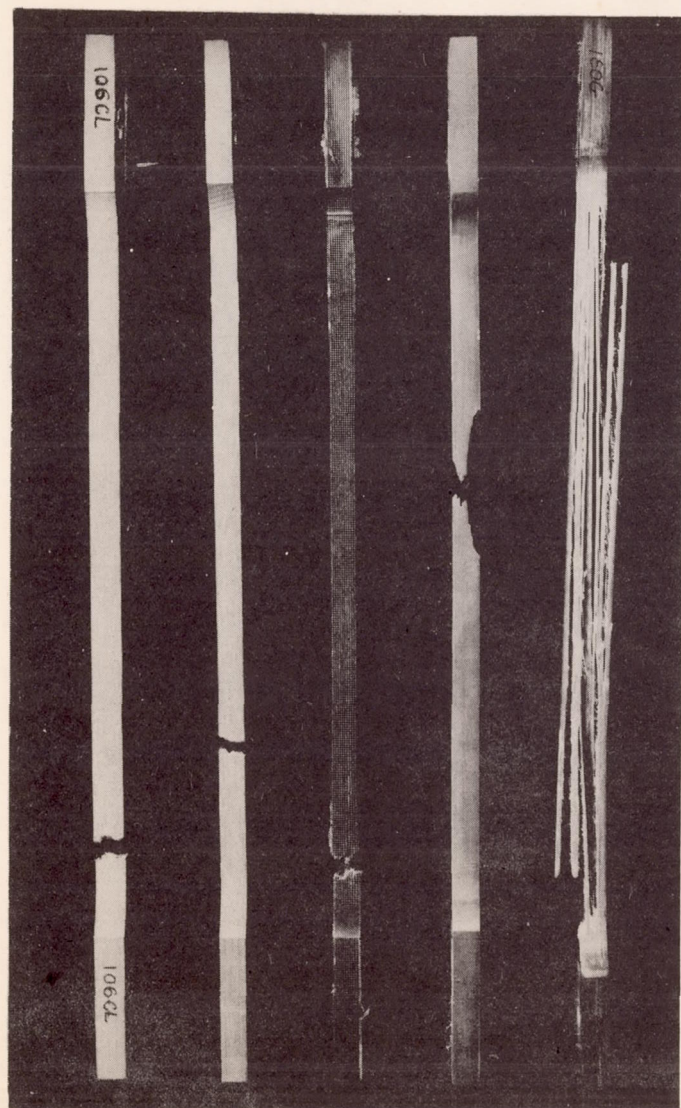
Static tension creep specimens showing type of fracture; left to right, materials CL, C, R, P and G.
